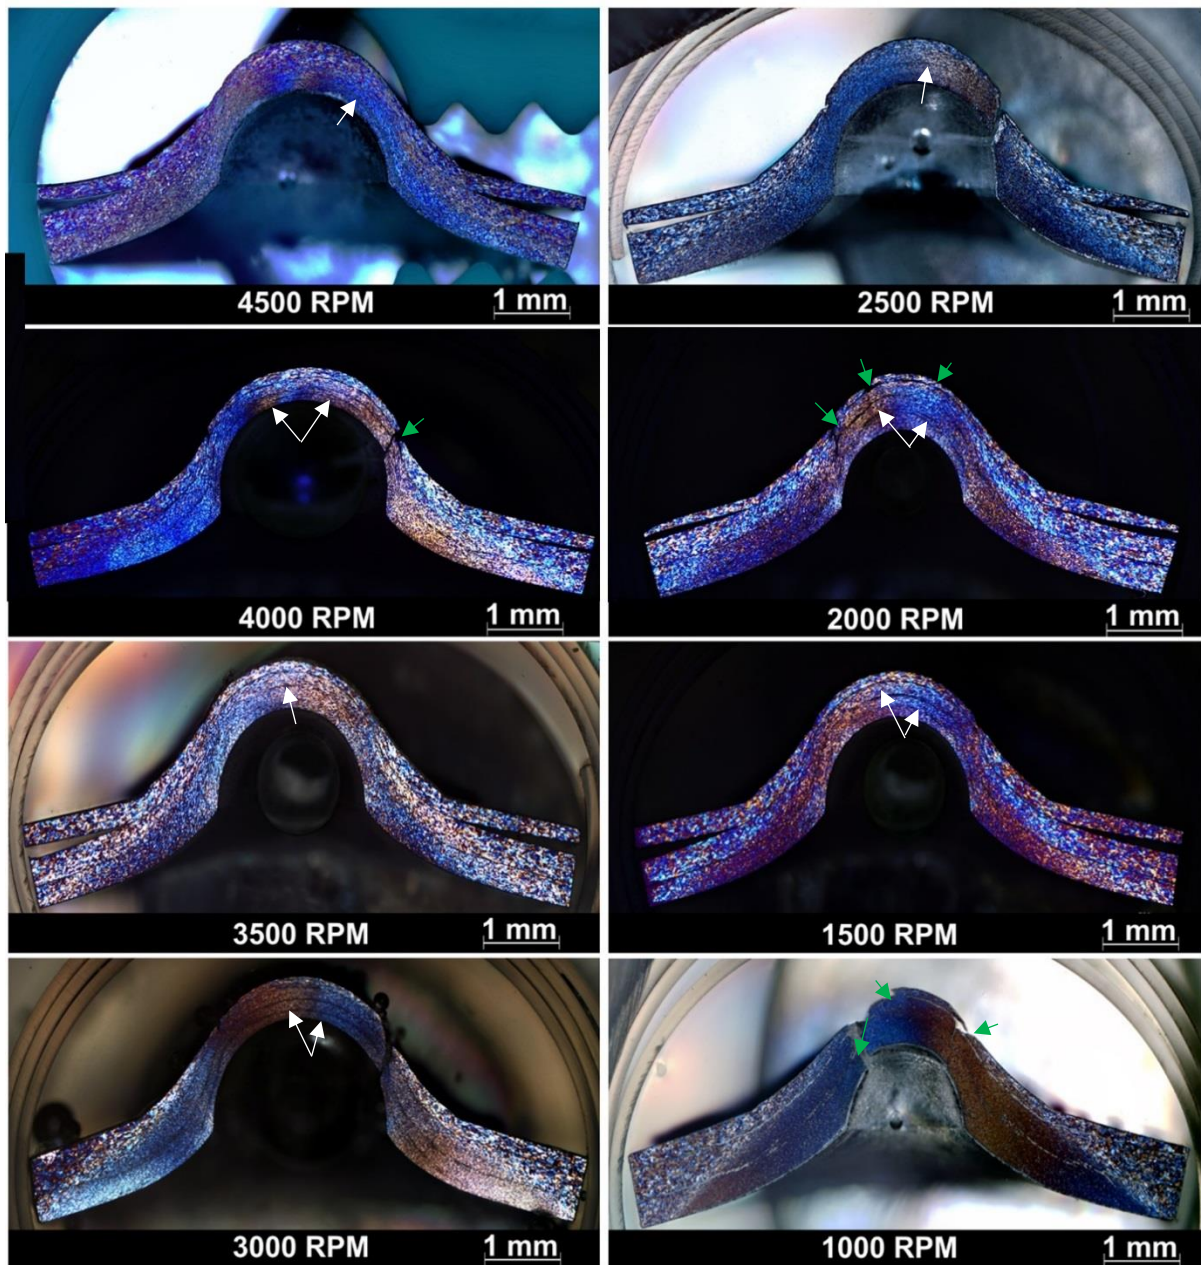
Macrographs of the SPT samples from batch II for welds produced with rotational speeds from 4500 to 1000 RPM after testing
